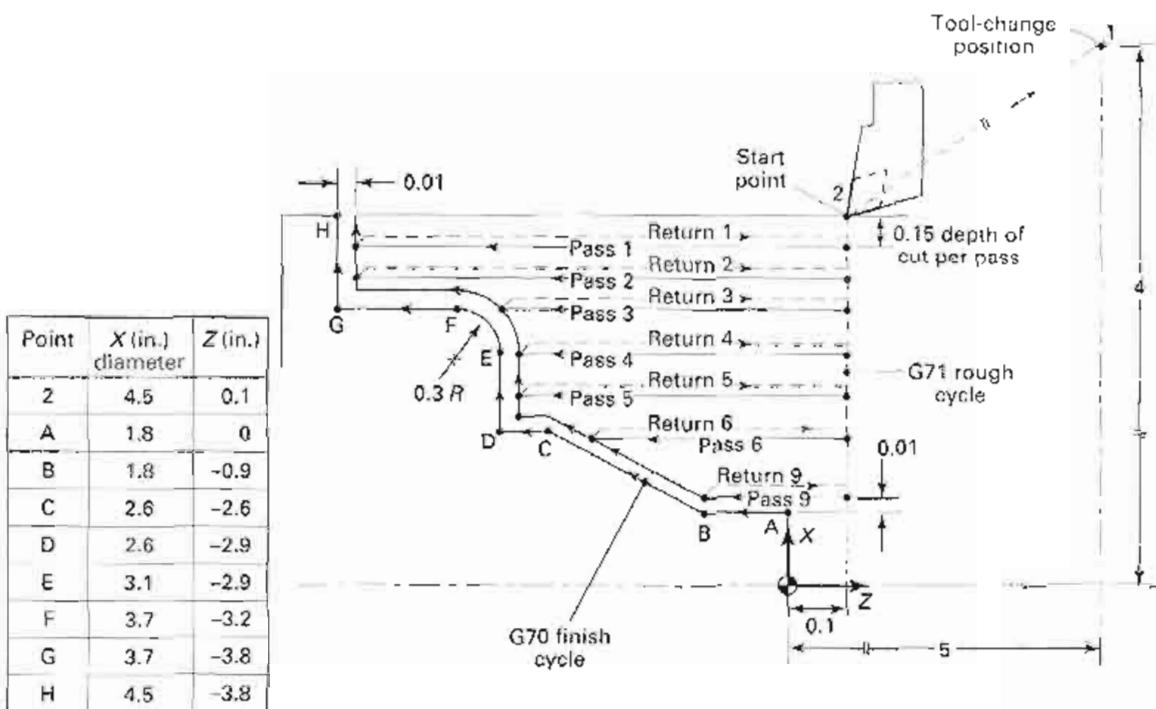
The tool paths necessary to rough and finish turn a part in a CNC lathe are computer generated using G codes.
